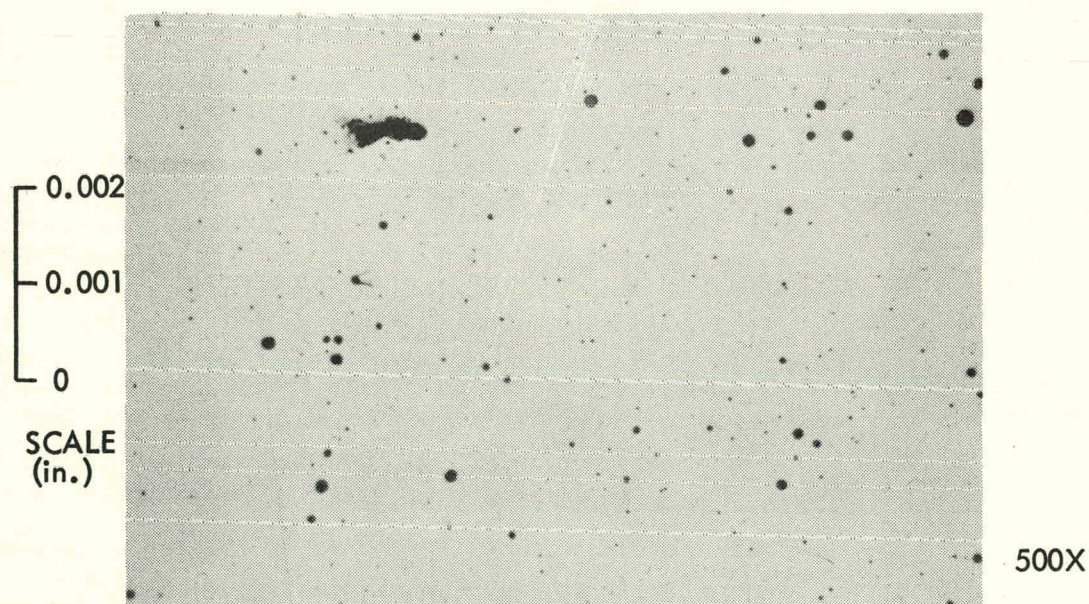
CENTER VIEW OF UPPER SPIDER CASTING: ML-1-I, S/N 11
